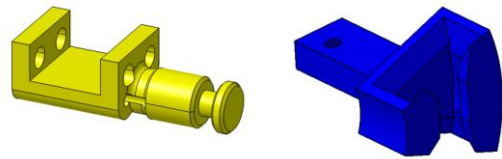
Detailed view on the both interacting key parts; Slider (left) and claw (right)
